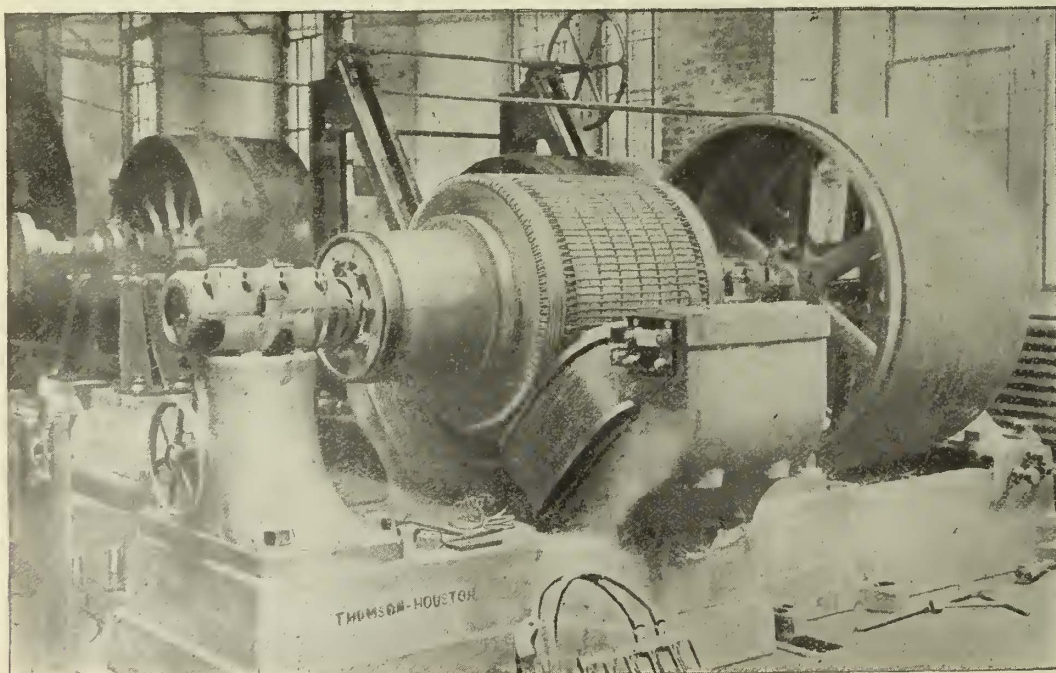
ASSEMBLING PARTS OF GENERATOR FOR TESTING.
